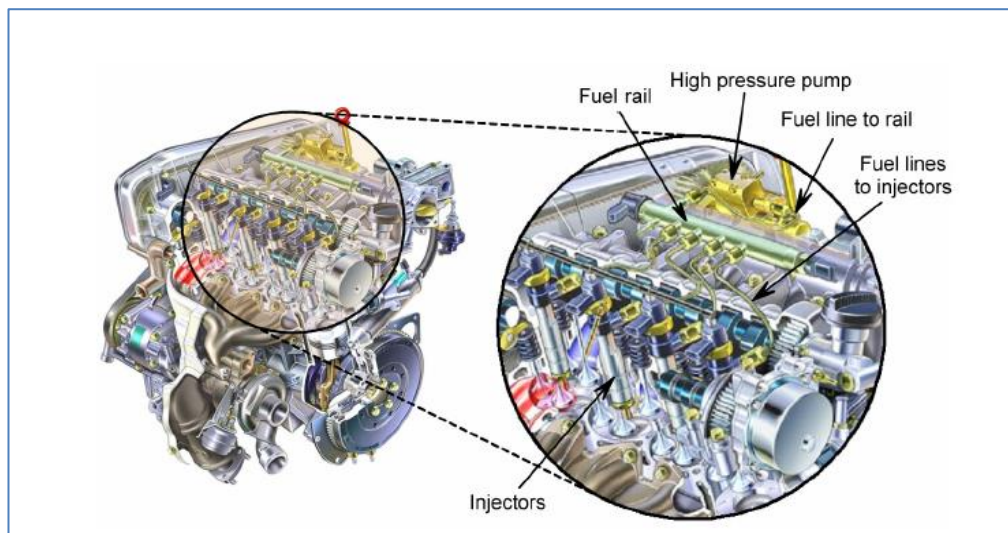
Mechanical components of a common rail fuel injection system of a diesel engine.
